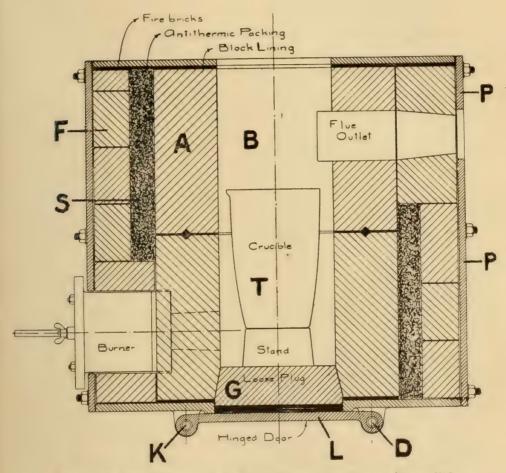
Sectional Elevation of 60-lb. Pot Furnace (negative can be supplied).
